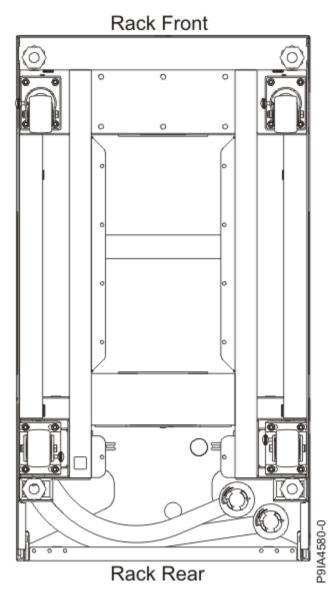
Bottom hose exit locations (when viewed from the bottom)
